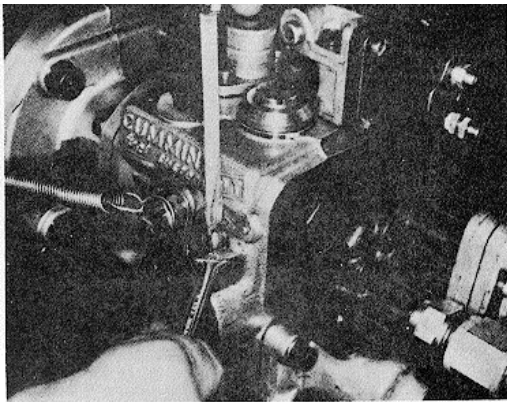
, F5115, Final fuel manifold pressure adjustment
